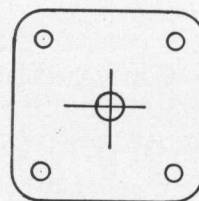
Plates are Sometimes Rivited to Both Sides of the Board to Form a Bearing for Centerboard Pin
